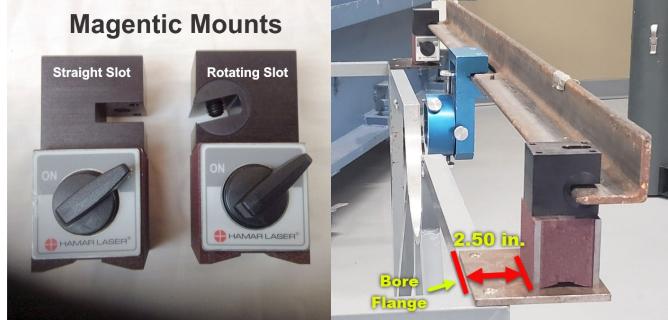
Pac Man Magnets (left) & Mounting Dimensions (right)
